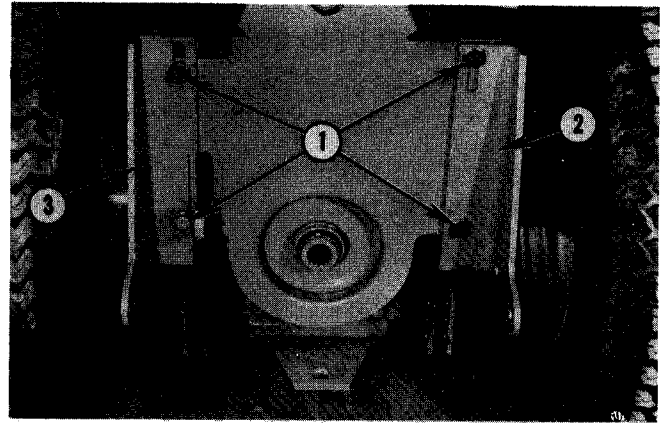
UPPER TILLER MOUNTING BRACKETS
